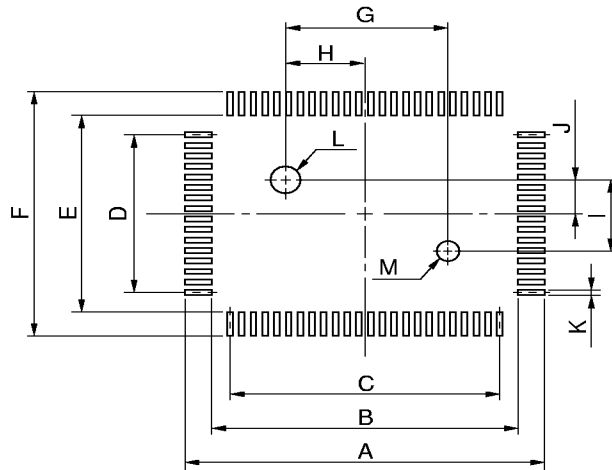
EV-9200G-80 Package Drawing (for reference only)
